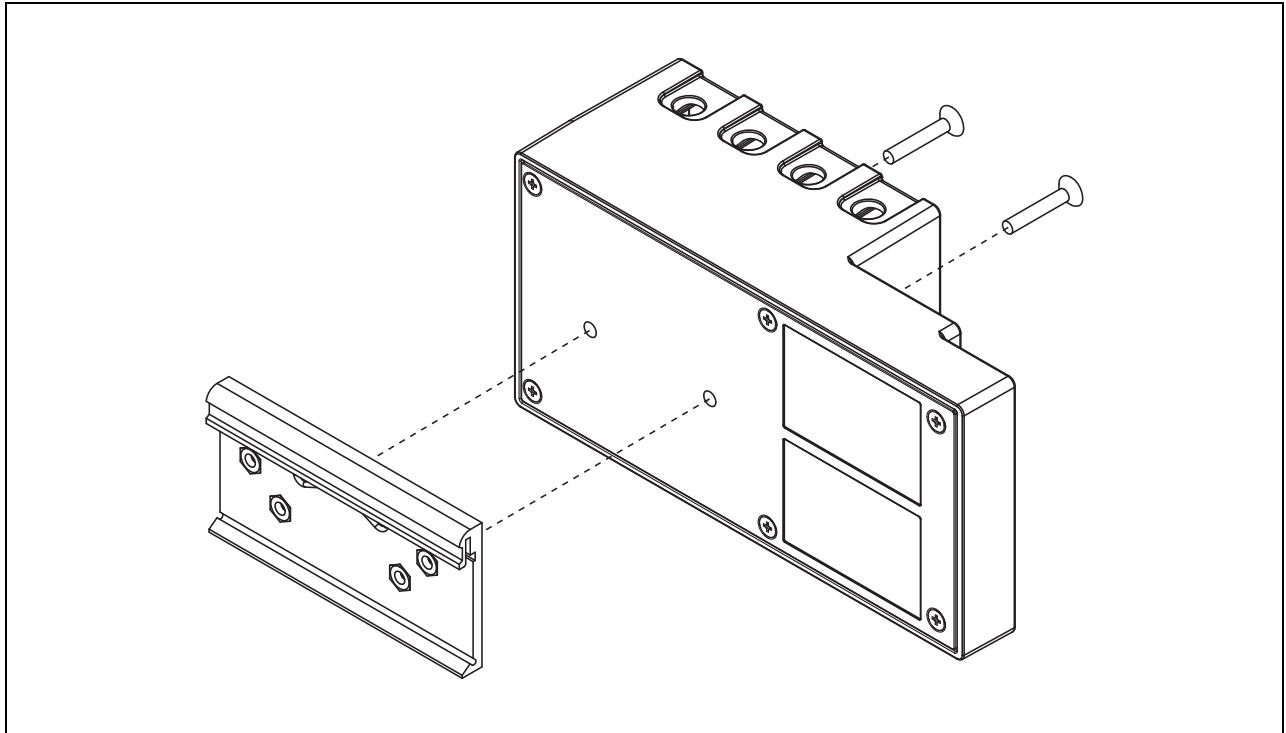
Installing the DIN Rail Clip on the cRIO-9075/9076
